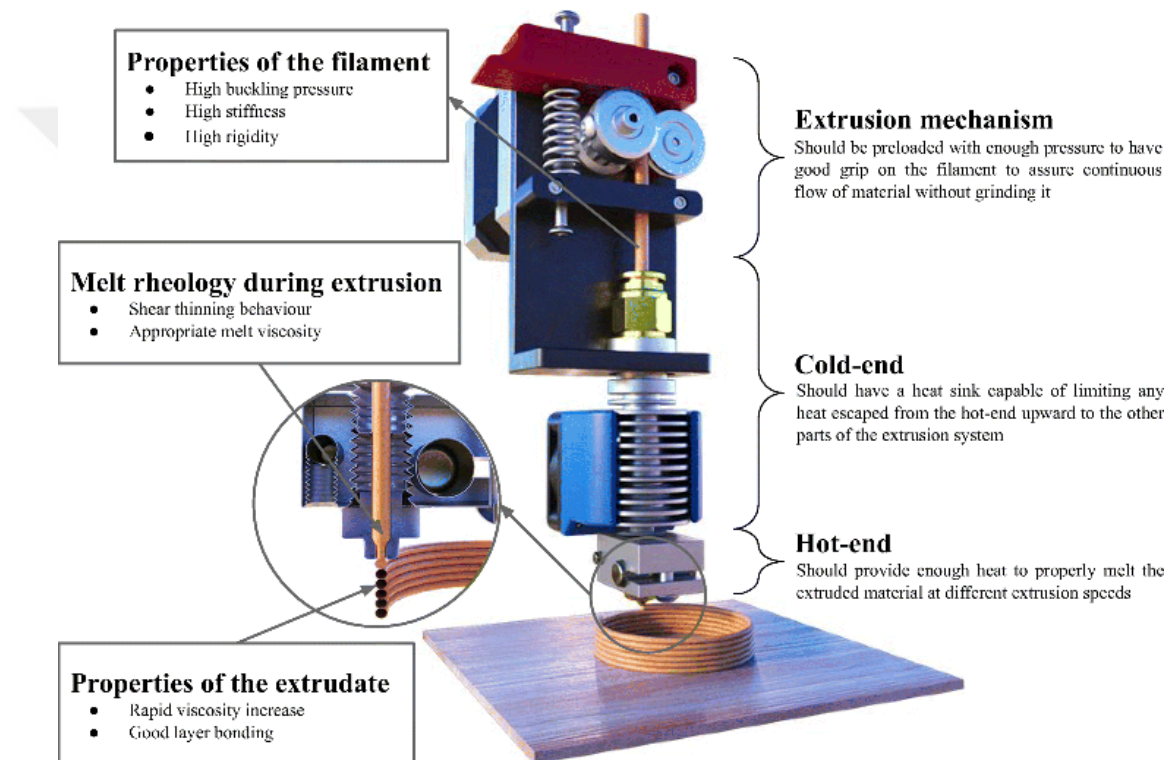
Fused filament fabrication (FFF) tool head [6].
